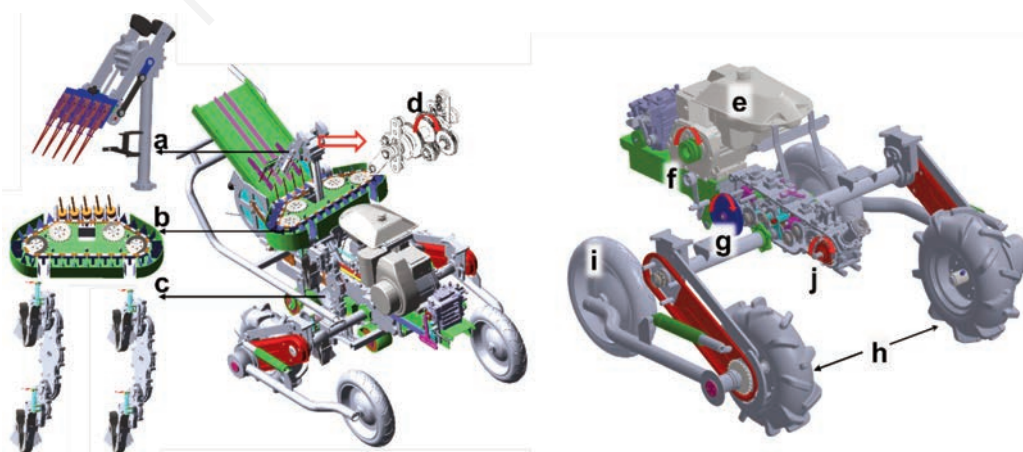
The overall structure of the automatic pepper transplanter: a- picking mechanism; b- conveyer mechanism; c- dibbling mechanism; d- picking gear; e- engine; f- engine pulley; g- gearbox pulley; h- rear wheel; i- front wheel; and, j- dibbling and picking shaft.
